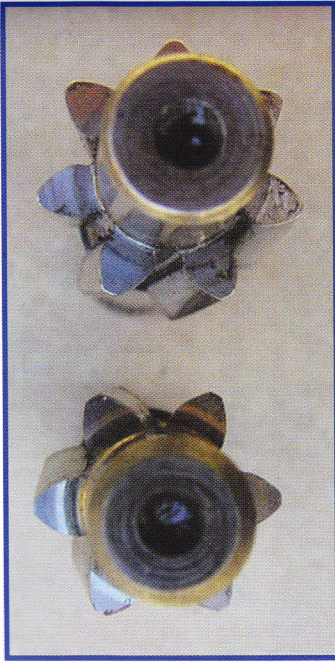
4-cylinder cars use 6 tooth pinions, 6-cylinder cars have 7 tooth pinions.
